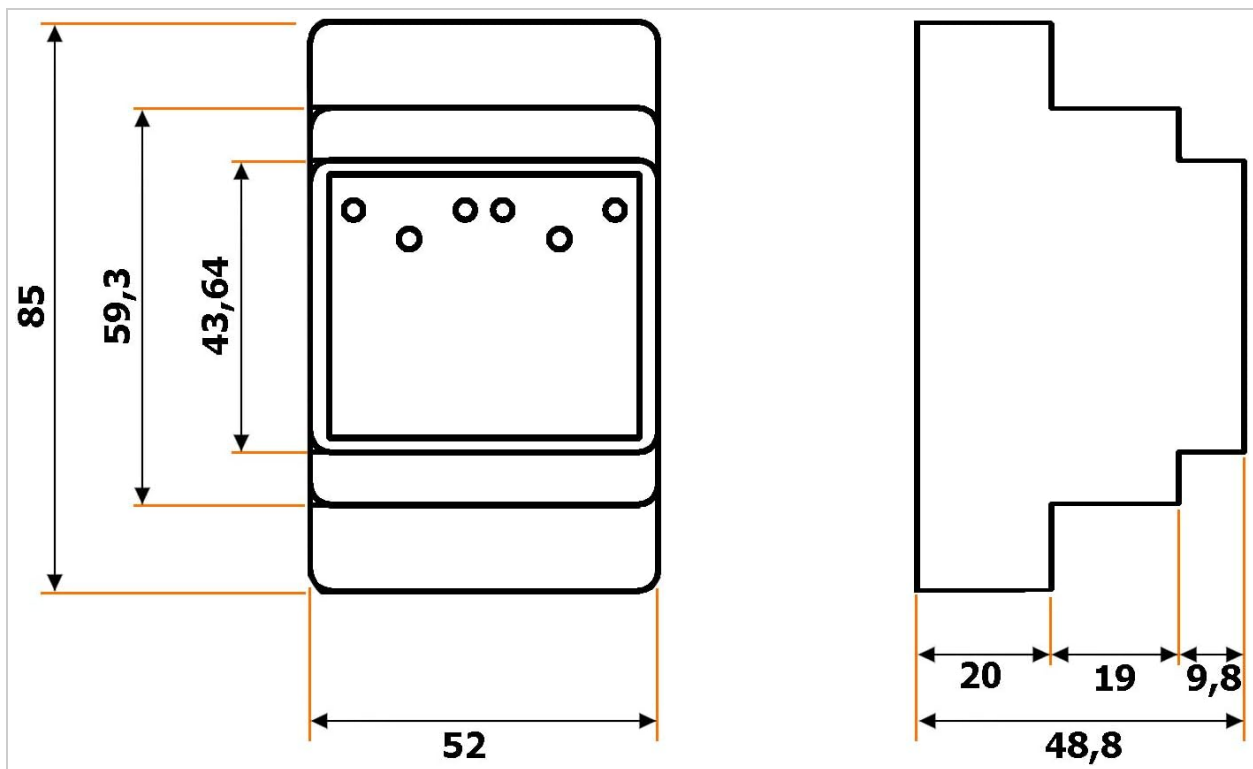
Dimensional drawing of the Mi-Heat ETR2 Thermostat (dimensions in mm).
